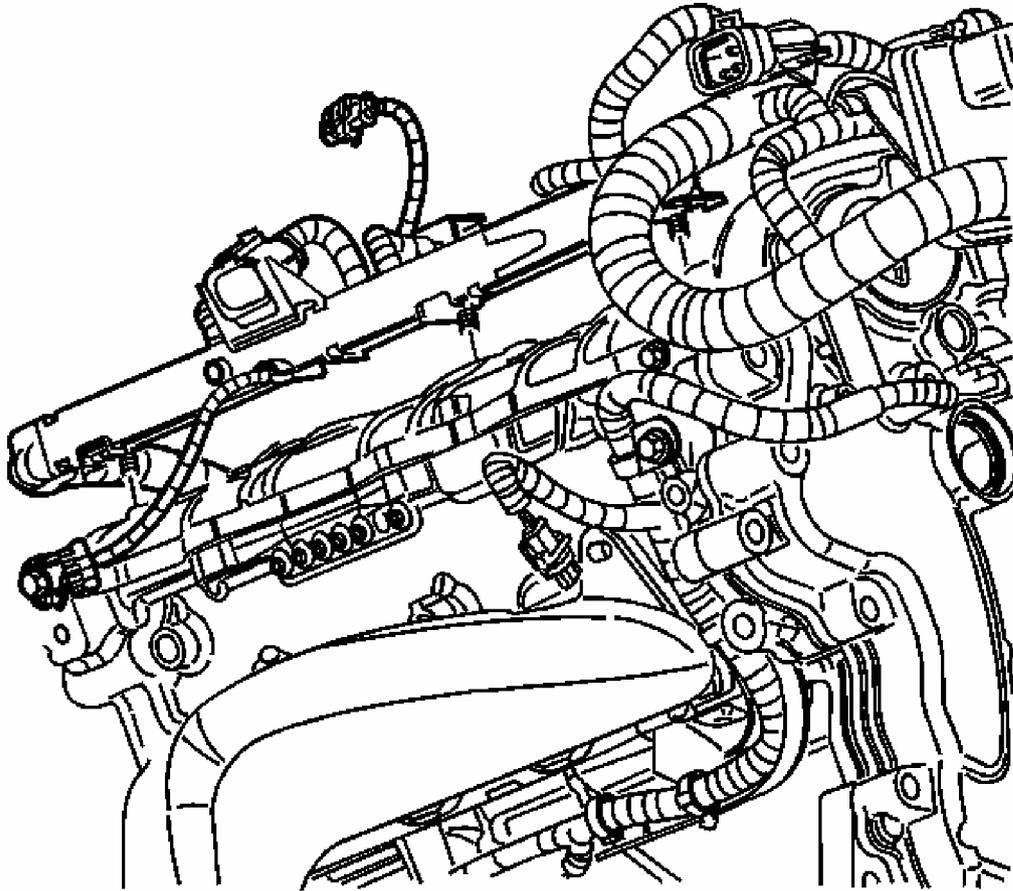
View Of Right Camshaft Cover Wiring Harness Connector - Top
